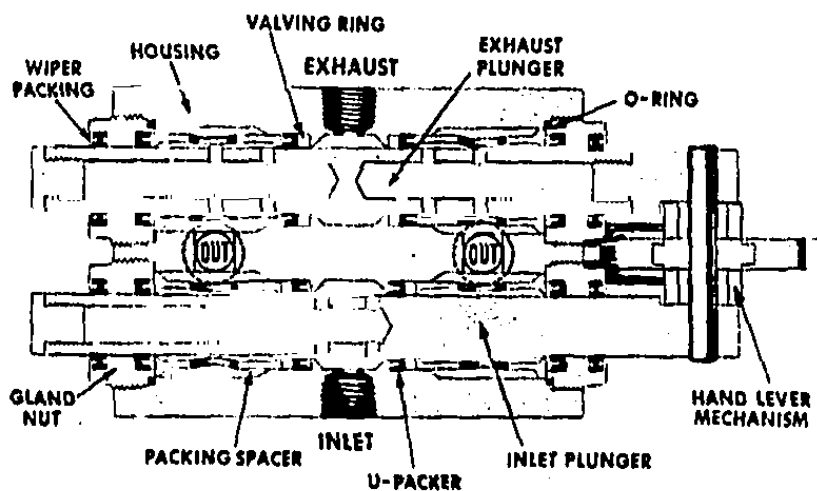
B. Sectional view of Hunt double plunger hydraulic valve showing the principal parts.
